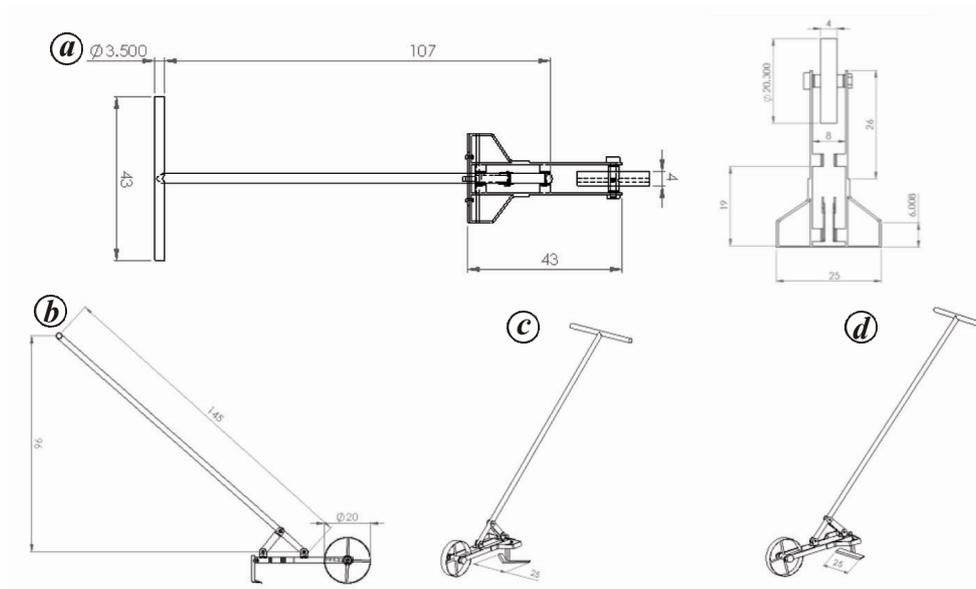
Schematic view of the developed weeders. *a*, Elevation drawing of main frame and weeding blade holder assembly; *b*, Plan; *c*, Apex angle 90°; *d*, Apex angle 180° (all dimensions are in cm).
